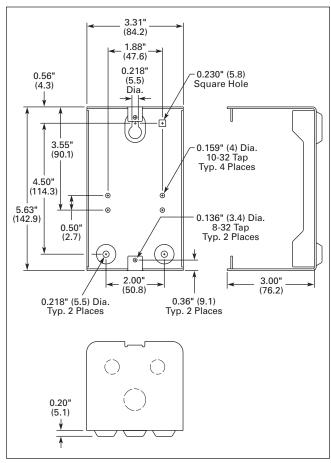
9575H2449 — Approximate Dimensions in Inches (mm)
